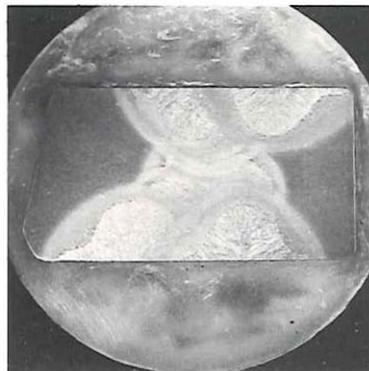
Full depth butt weld in AS1204-Grade 350 LO Plate magnification 1.5 polished and etched section.
